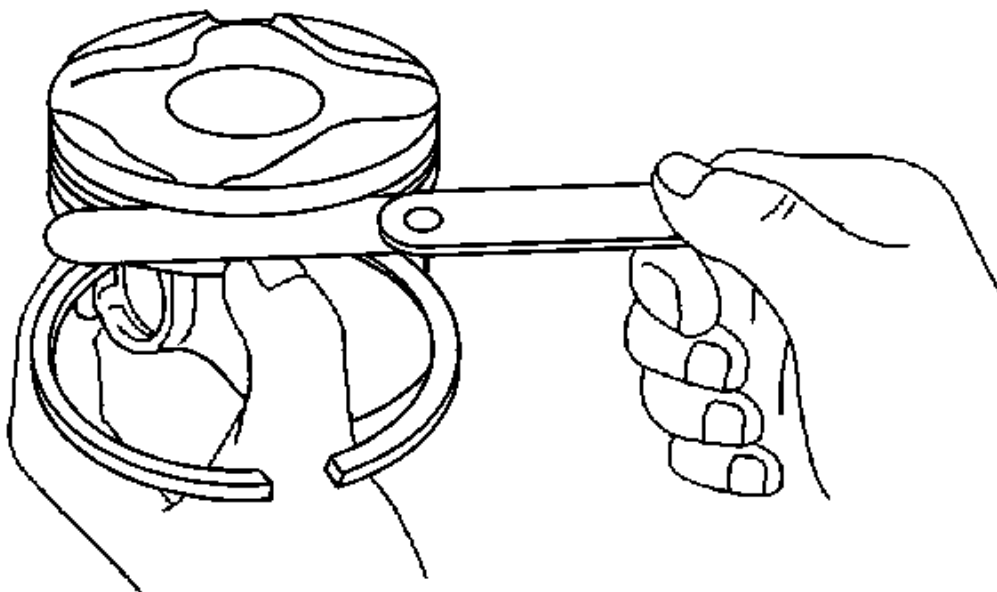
Measuring Ring-To-Piston Wall Clearance
